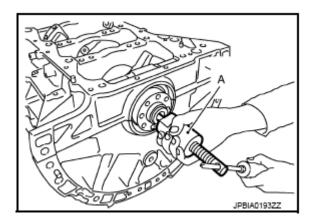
Removing Pilot Converter Using Pilot Bushing Puller Courtesy of NISSAN NORTH AMERICA, INC.
